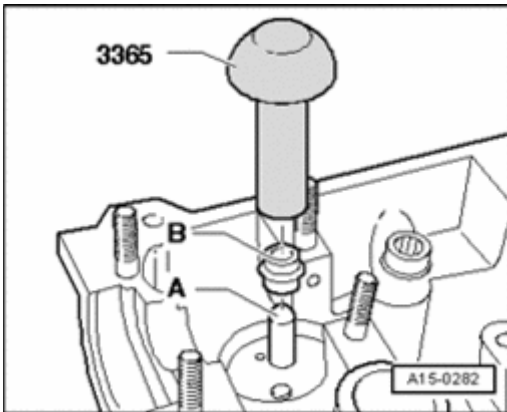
Identifying Plastic Sleeve, Valve Stem Oil Seal & Valve Stem Seal Driver 3365
